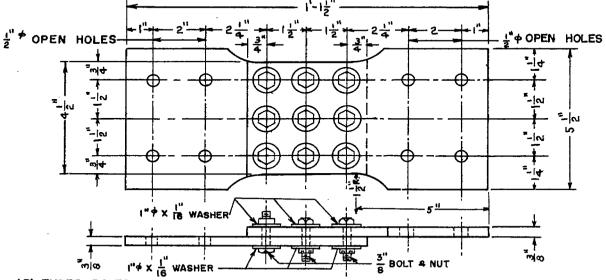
FATIGUE TEST SPECIMENS USED AT UNIVERSITY OF ILLINOIS FOR 0.375" SHEET.
